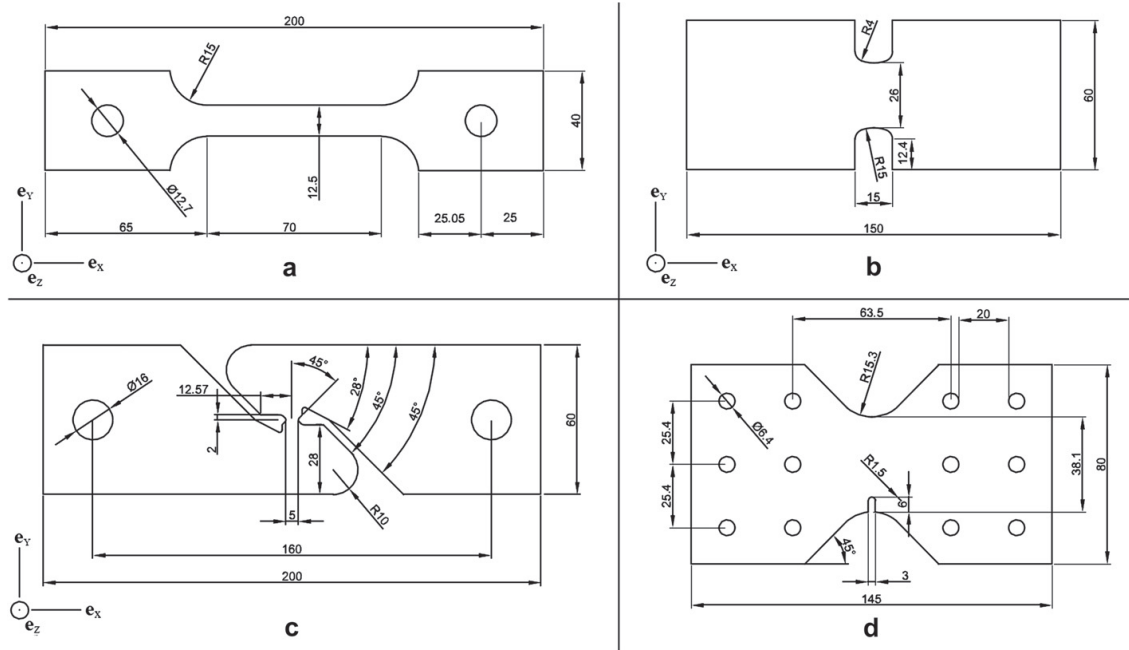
Geometry of the test specimens (in mm): (a) uniaxial tension specimen, (b) plane-strain tension specimen, (c) in-plane shear specimen, and (d) modified Arcan specimen.
